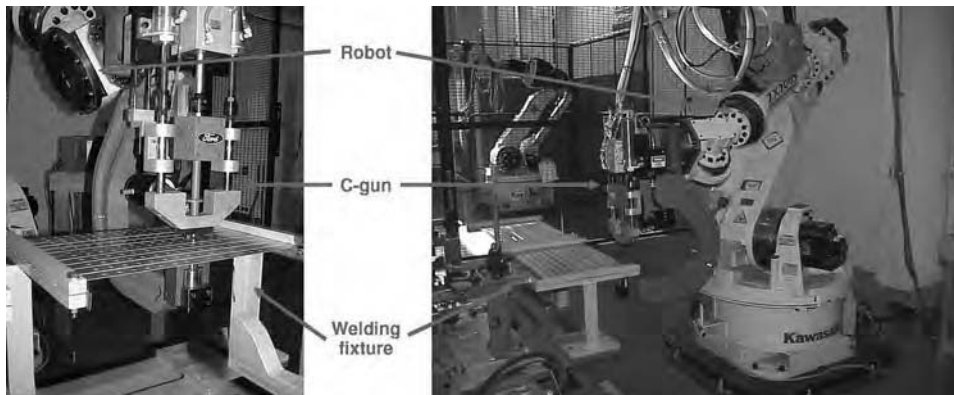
C-frame ultrasonic welder on a robot arm programmed to make successive spot welds on coupons for a tip life study
